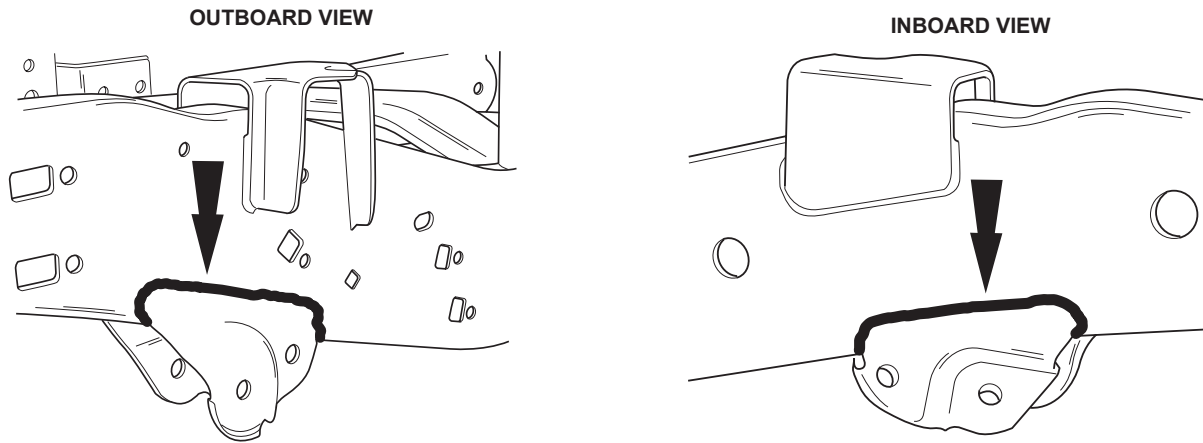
GRIND WELDS SHOWN TO REMOVE DAMAGED REAR SPRING FRONT HANGER BRACKET, DO NOT GRIND INTO THE REAR FRAME RAIL MATERIAL WHEN REMOVING THE BUMPER BRACKET FROM THE FRAME, RH SHOWN, LH SYMMETRICALLY OPPOSITE
